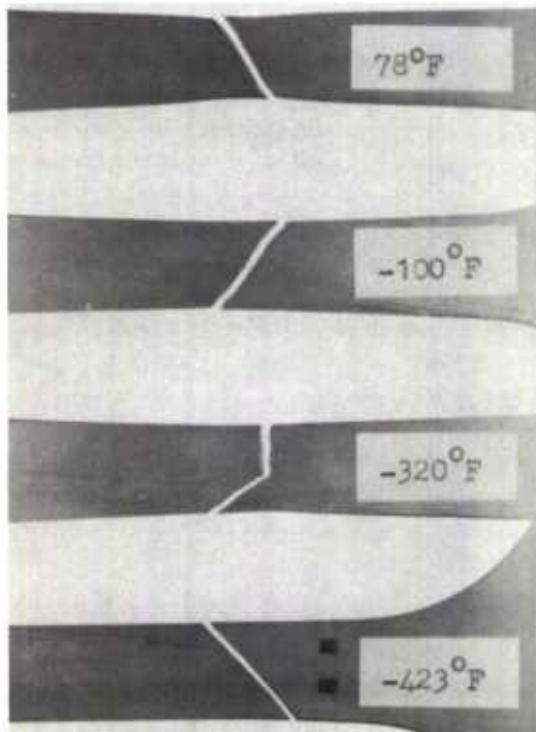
Photomacrographs of Fractured Tensile Specimens
